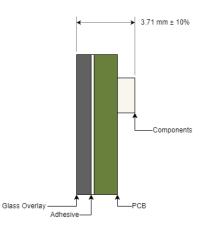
Stack-Up (B) - Thickness: PCB + 3M double-sided adhesive + glass overlay
